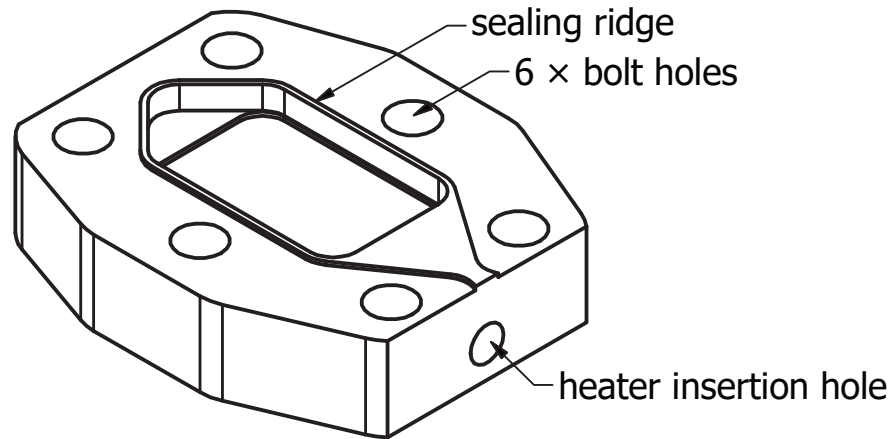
Schematic drawing of the final bottom copper sealing and heat spreading block.
